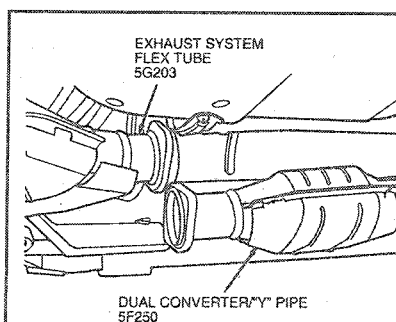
Remove the exhaust pipe-to-catalytic converter attachment
